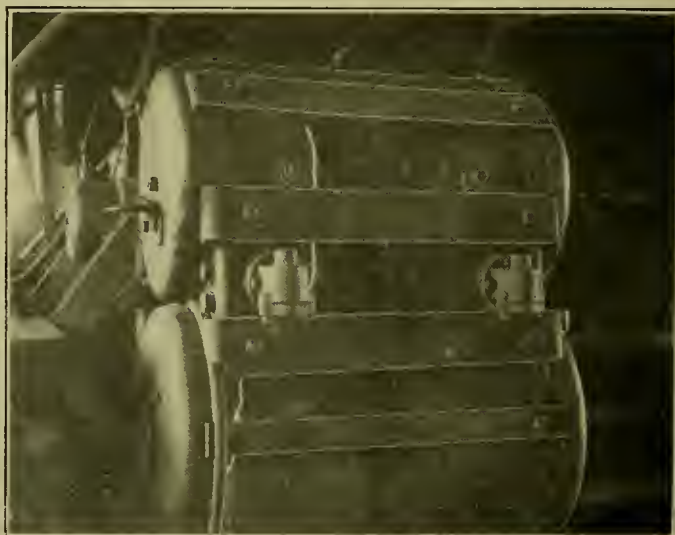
CYLINDERS AFTER BRACES HAVE CLOSED UP CRACK.
